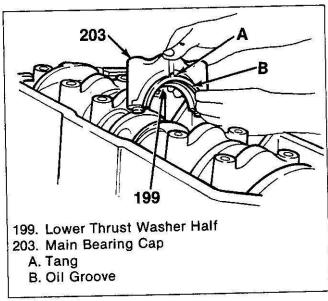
Installing the Crankshaft Lower Thrust Bearings
